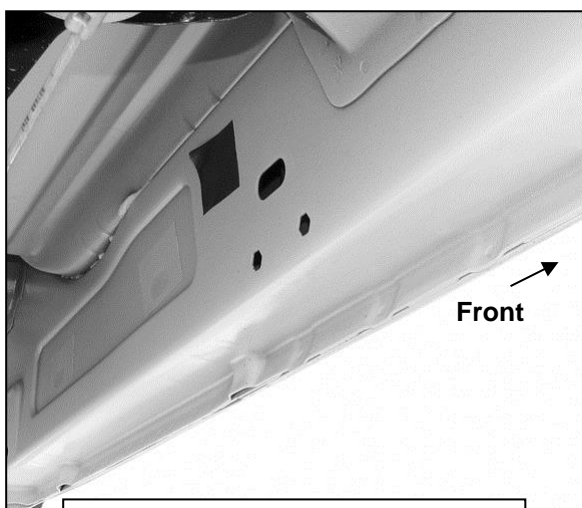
Attach Support Bracket to back of pinch weld (models with factory holes in pinch weld only)
